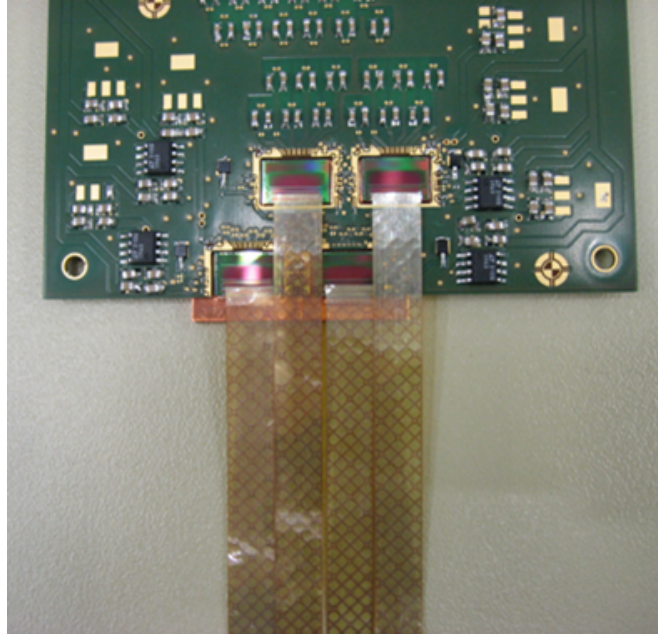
A photograph showing a test STS-XYTER prototype front-end electronics chip attached to 4 read-out cables.
